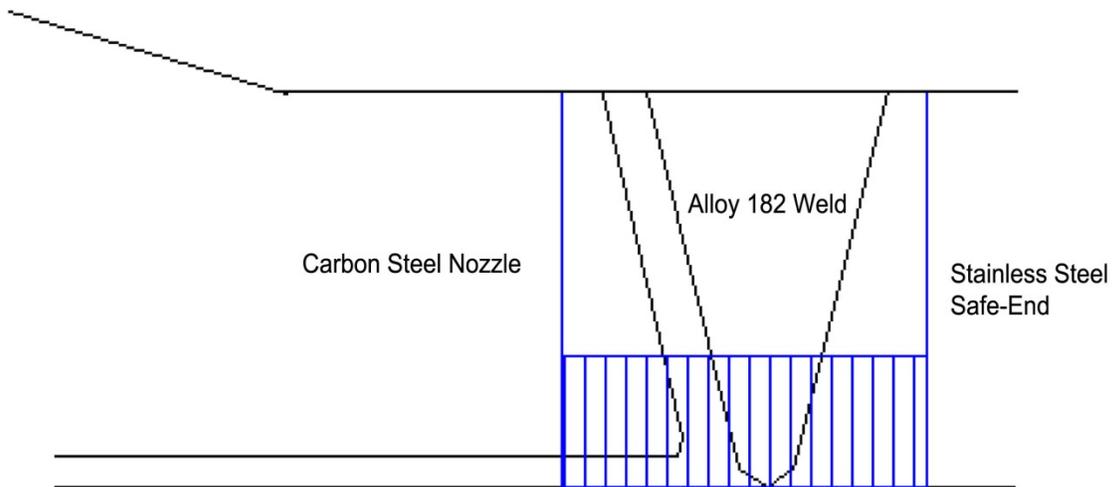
RPV Hot Leg Nozzle Weld Circumferential Scan CRV Coverage Assessment
